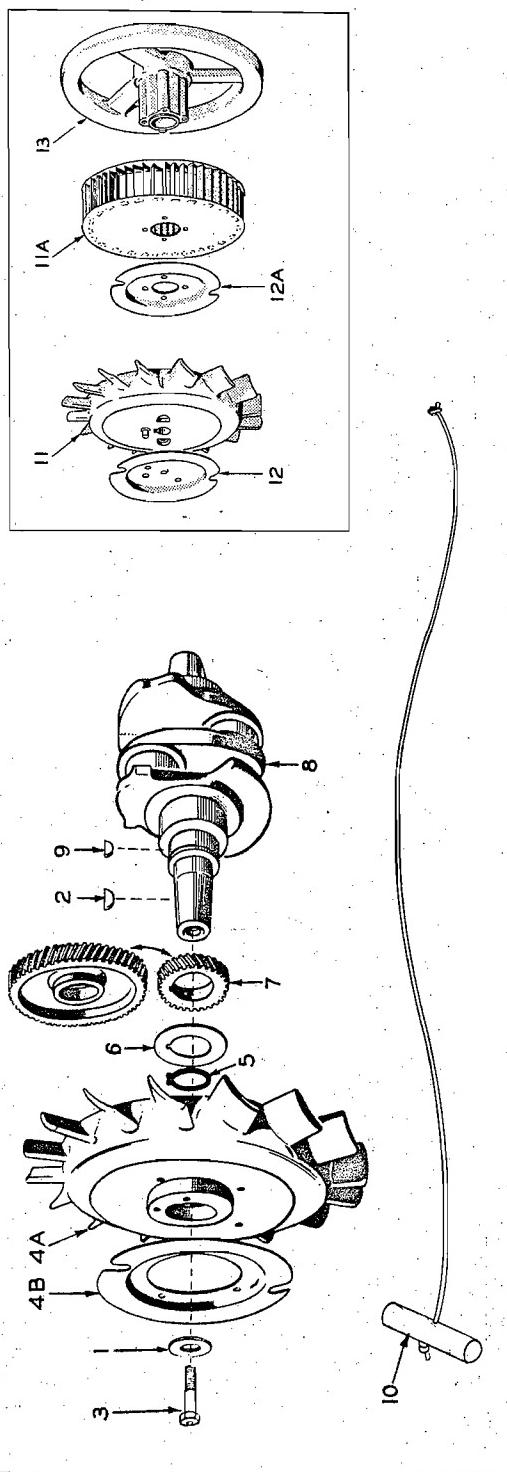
FIG. C - CRANKSHAFT AND FLYWHEEL GROUP
